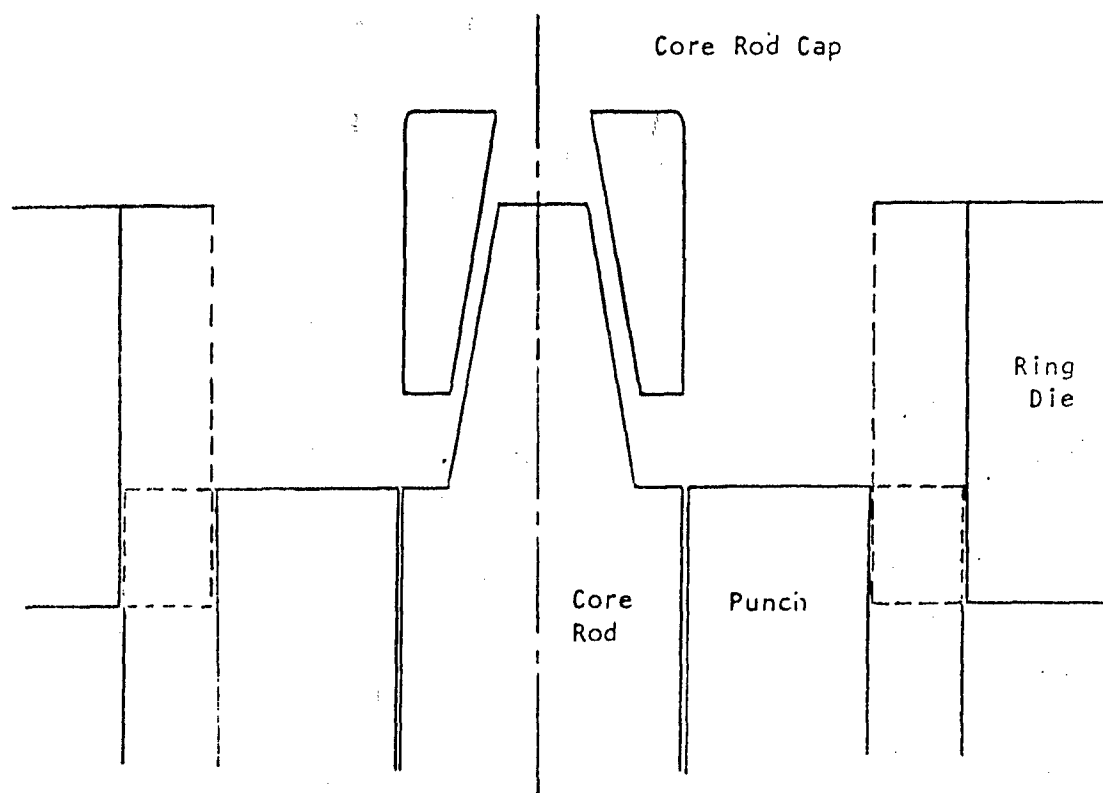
Segmented Core Rod Concept for Reduction of Ejection Load.
